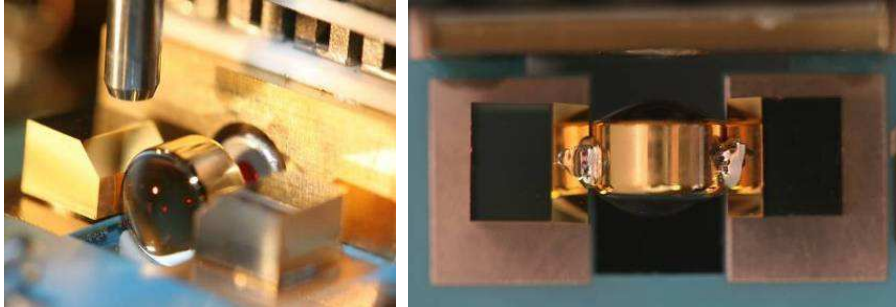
Lens soldered by solder ball bumping (front and top view)
